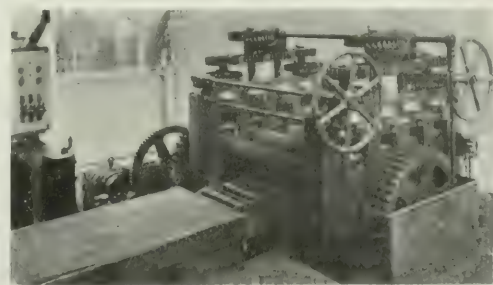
THREE-PHASE MOTOR, DIRECT GEARED TO PLATE-STRAIGHTENING MACHINE.
